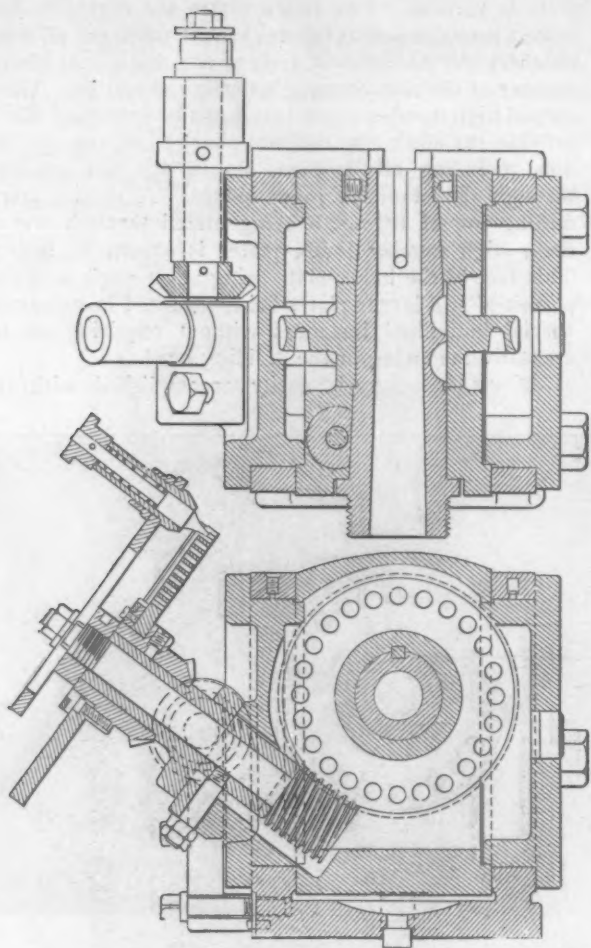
Sectional Plan and Elevation of the New Kemp Smith Dividing Head.
